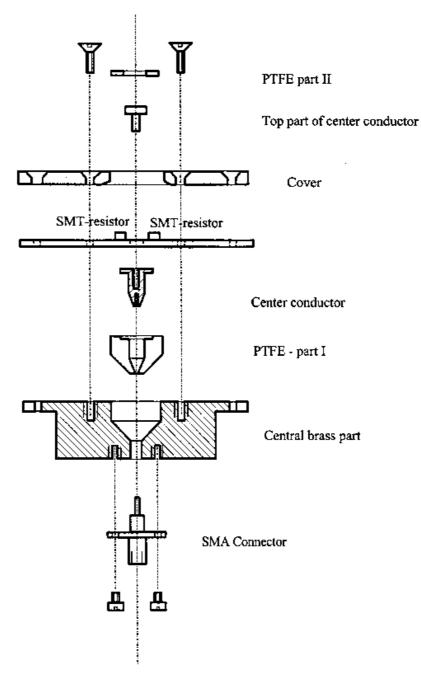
Mechanical drawing of a coaxial target, part 5/5
